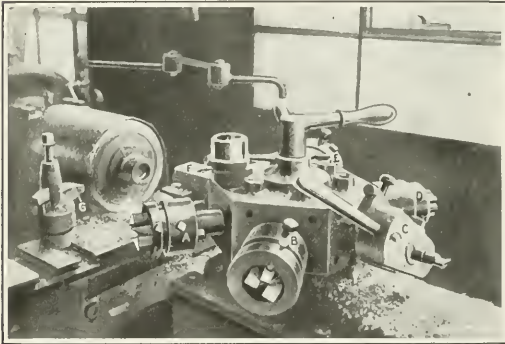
Set-up on Warner & Swasey Brass-working Lathe for performing First Series of Machining Operations on Fuse Body
